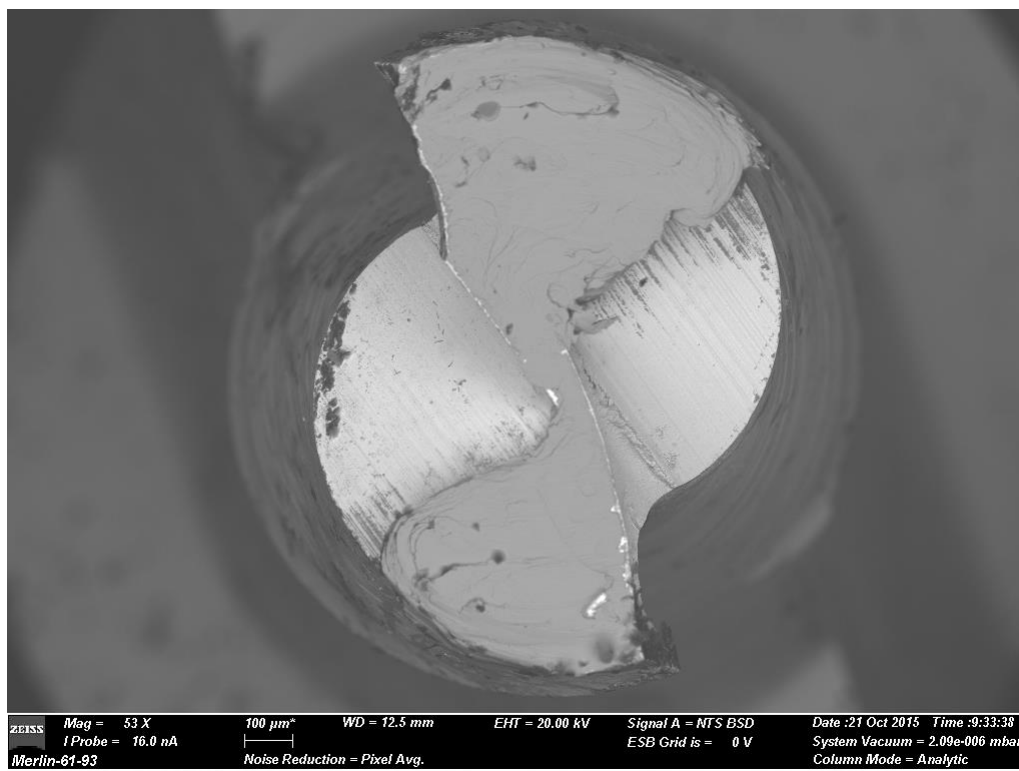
Experimental run 2: Tungsten carbide tool after machining with parameters $v_c=75.4$ [m/min], $v_f=768$ [mm/min] and $a_p=93.75$ [μm]
